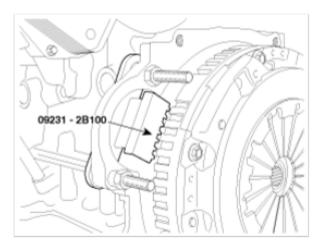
Holding Ring Gear Using SST (09231-2B100) Courtesy of HYUNDAI MOTOR AMERICA
